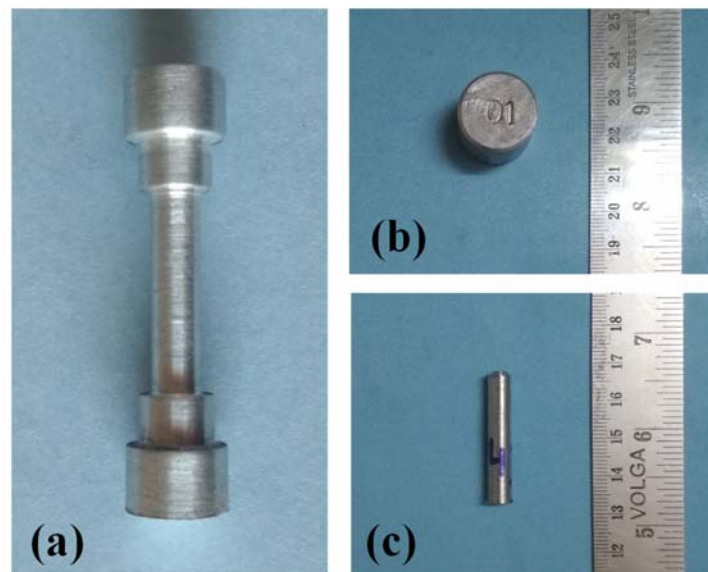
(a) Tensile test specimen (b) Hardness test specimen (c) Wear test specimen
